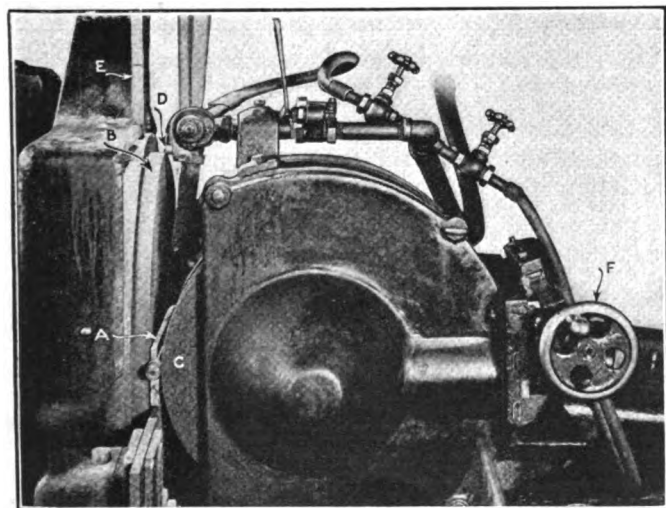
SPRING BOLT IN POSITION FOR GRINDING
